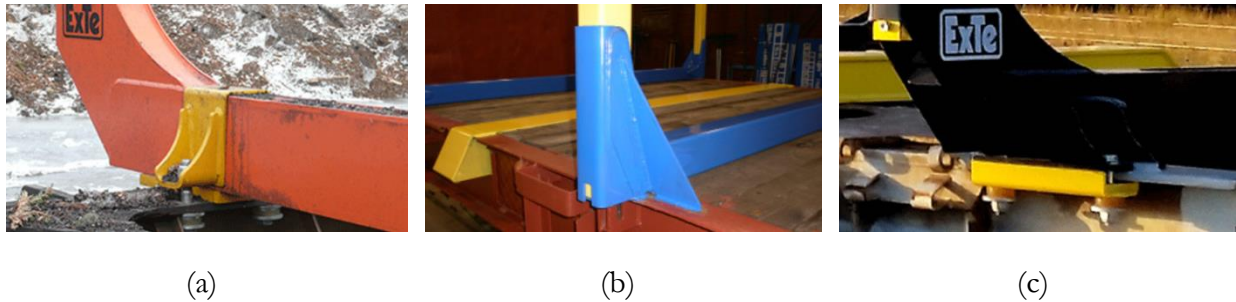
Types of fixtures for the timber-bunks. (a) Over-yoke bolted; (b) Welded; (c) Clamped.
